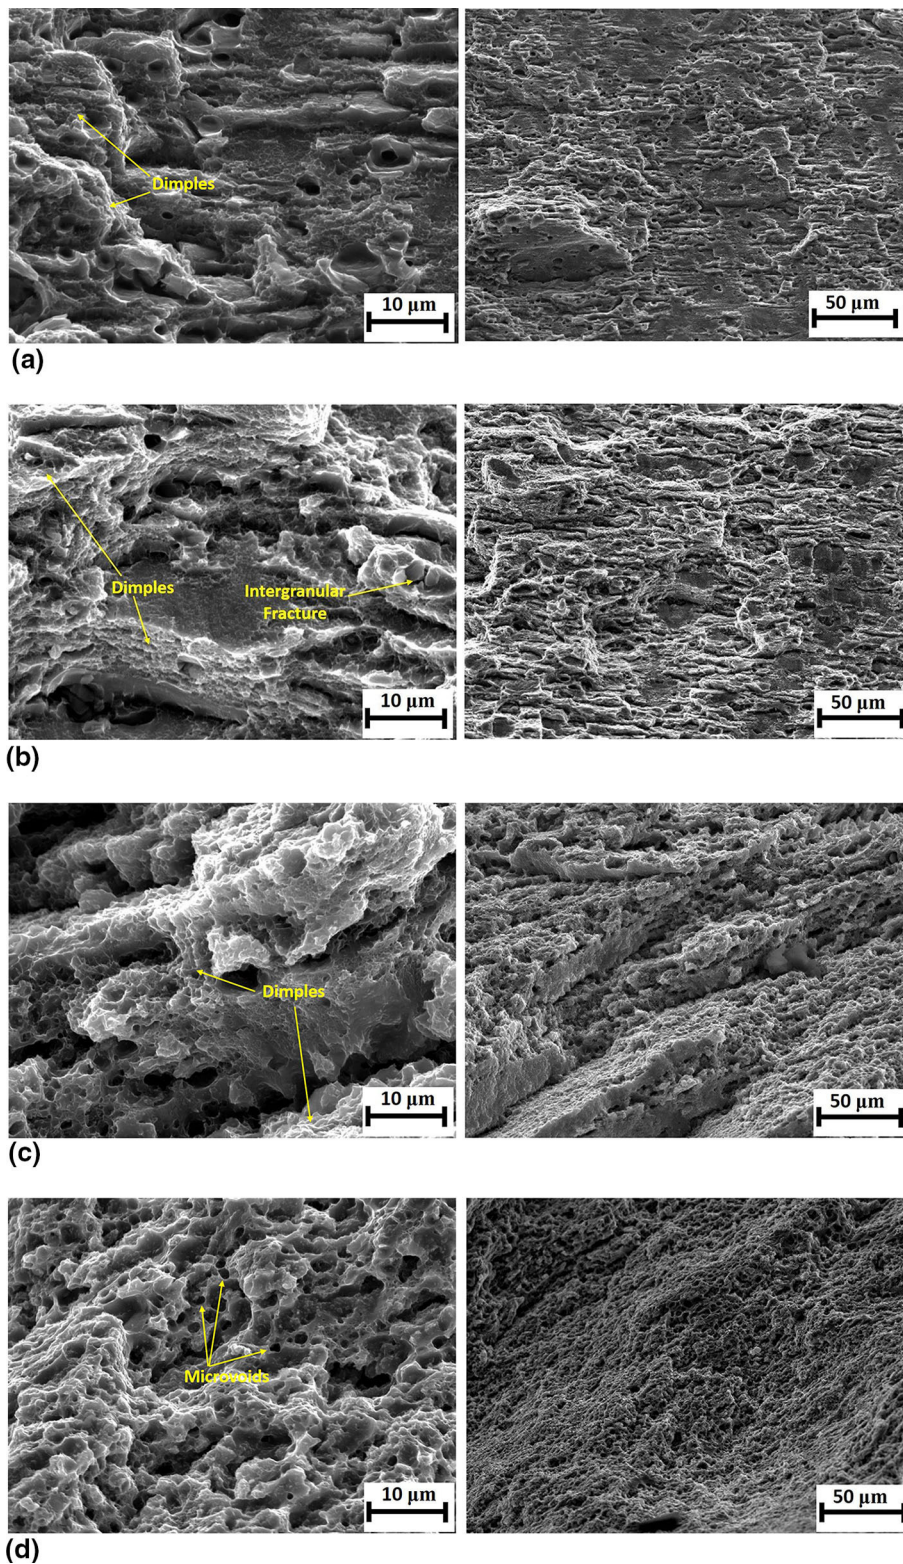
Tensile fracture surfaces of (a) base metal (7075-T6 aluminum alloy), and (b) FSWed, (c) STACAA and (d) STWQAA aluminum 7075 alloy tested with a crosshead speed of 0.8 mm/min (The pictures on the left and right show high and low magnification, respectively)
